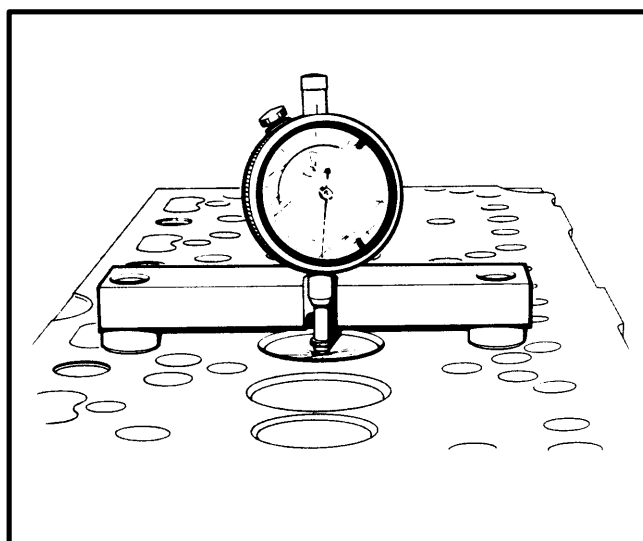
CHECKING THE DEPTH OF THE VALVE HEAD
